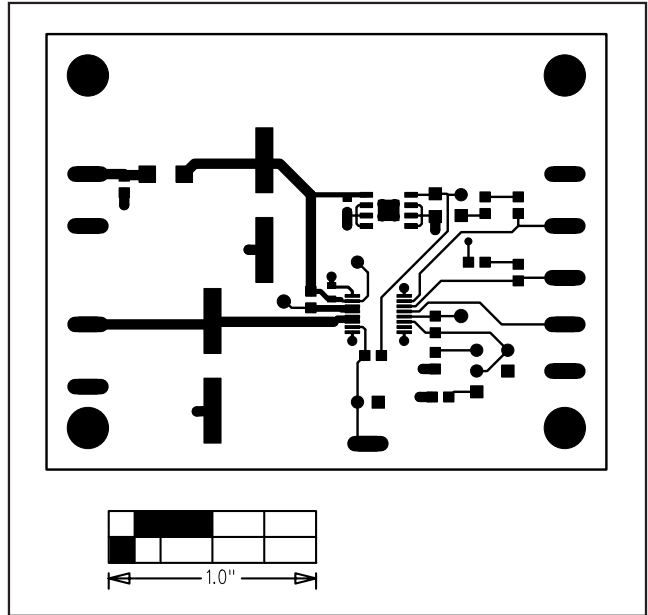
MAX16913A EV Kit PCB Layout—Component Side
